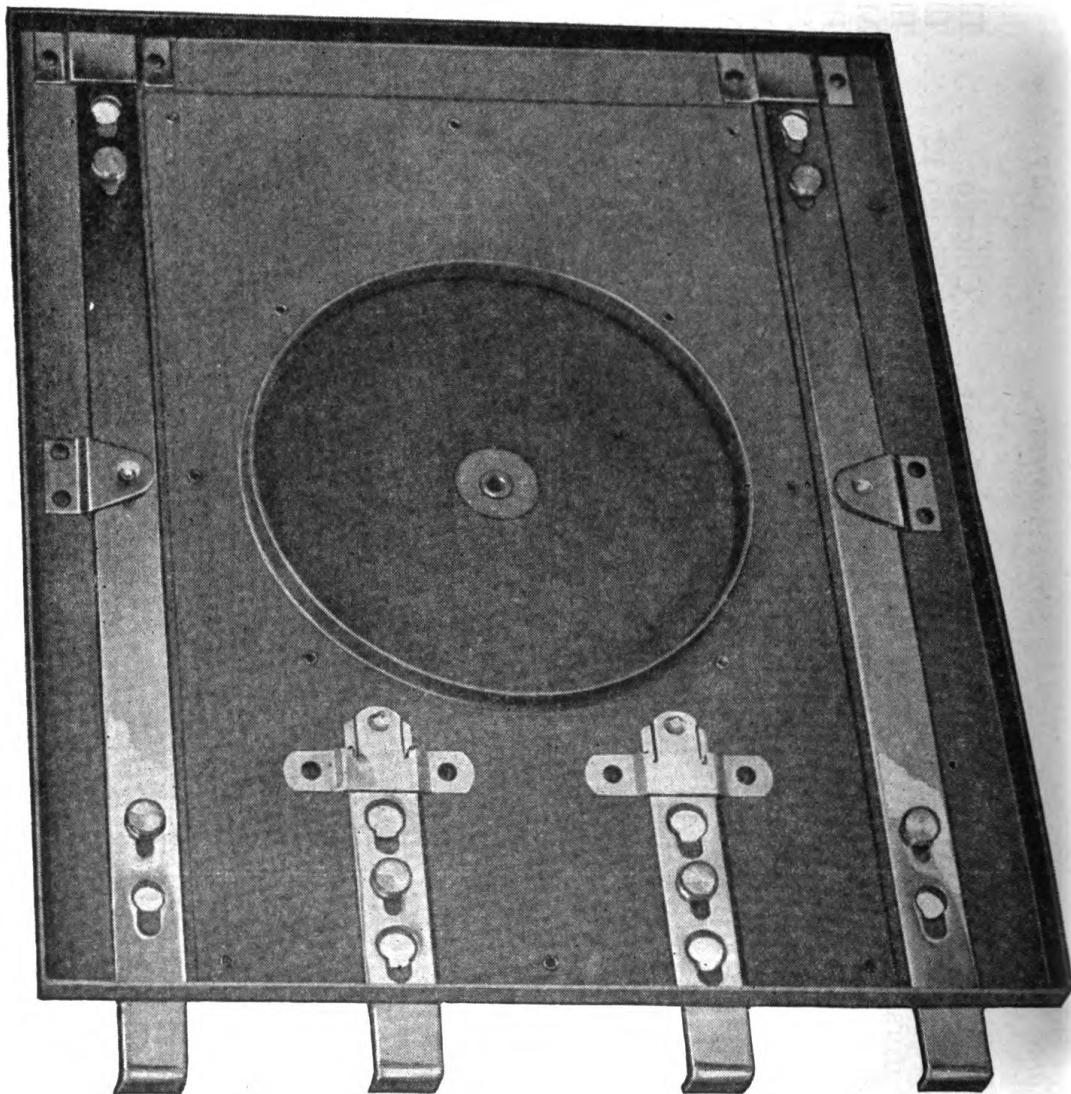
Mounting Plate FT-363-B, bottom view.
